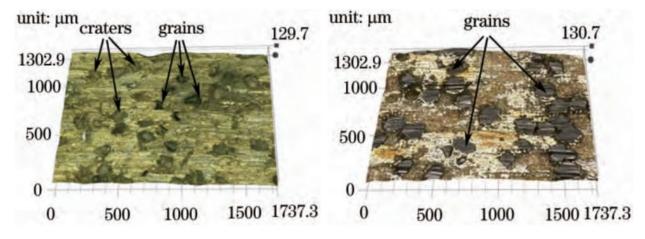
The micro-topography of the grinding wheel surface before and after laser dressing [30].
